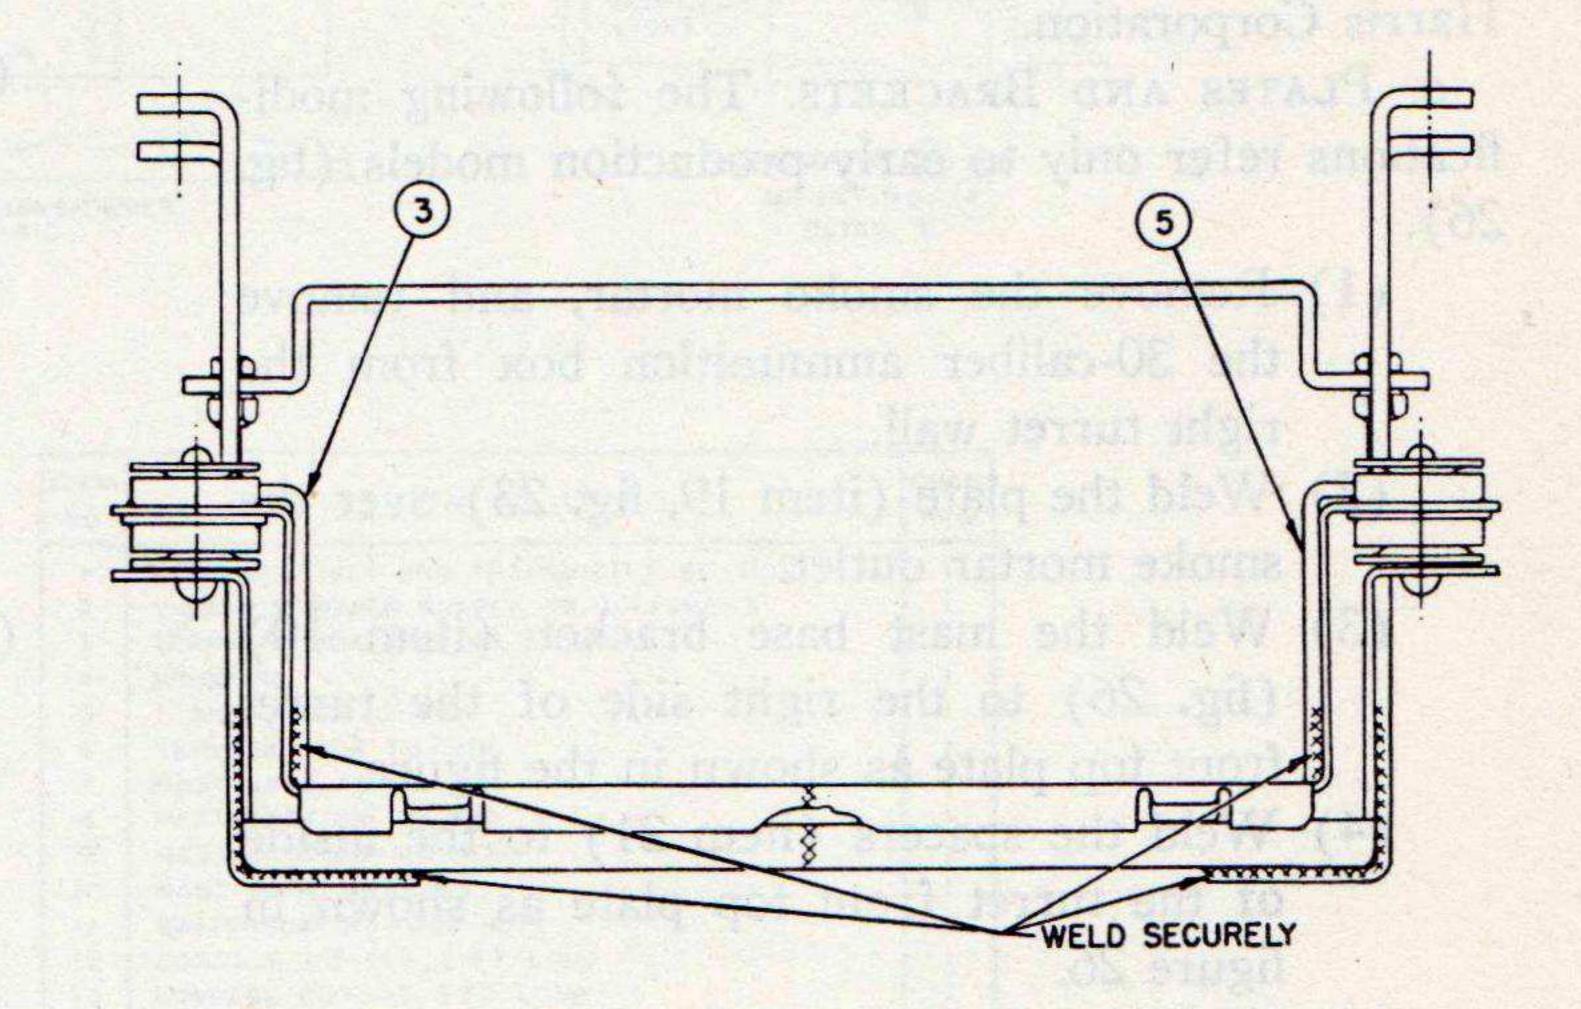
Mounting for Radio Set AN/VRC-3 in Tank, Light, M24.
